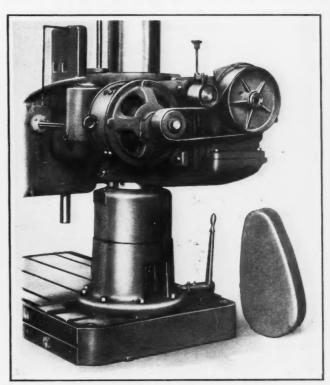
Belted Motor Drive through Gear-box on Arm, with Cover removed to show Belt Tensioning Device
